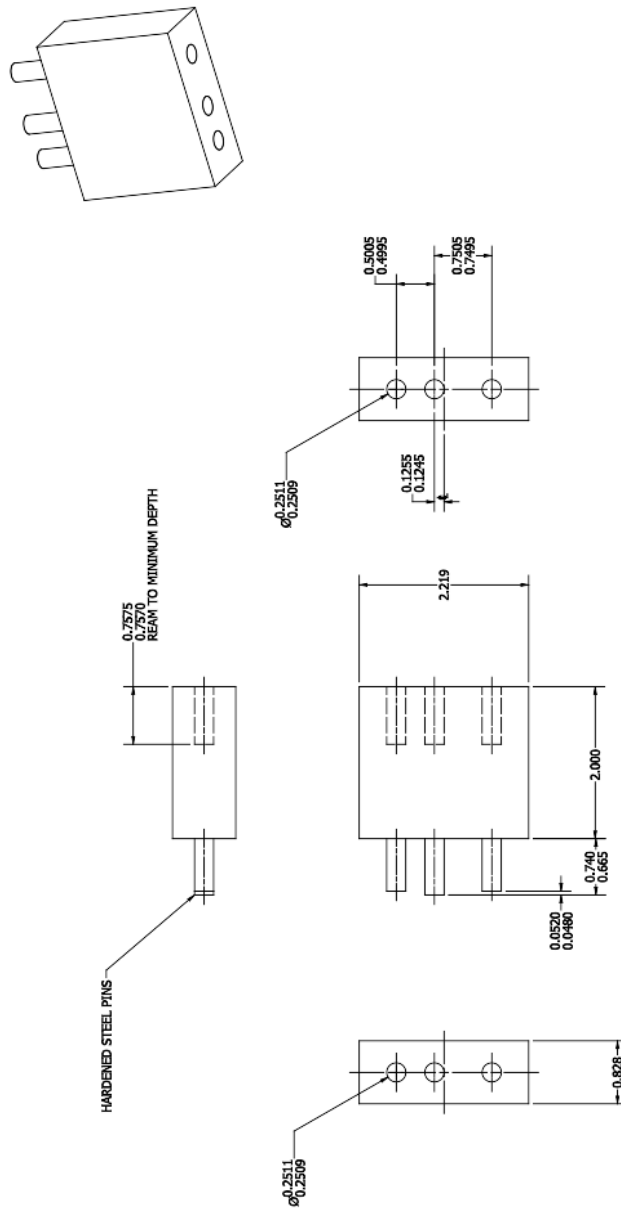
Pin and sleeve alignment test fixture - 20 ampere devices (5T20)
